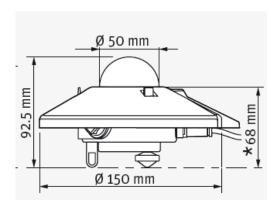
Dimensions of the CMP6, CMP11, and CMP21
